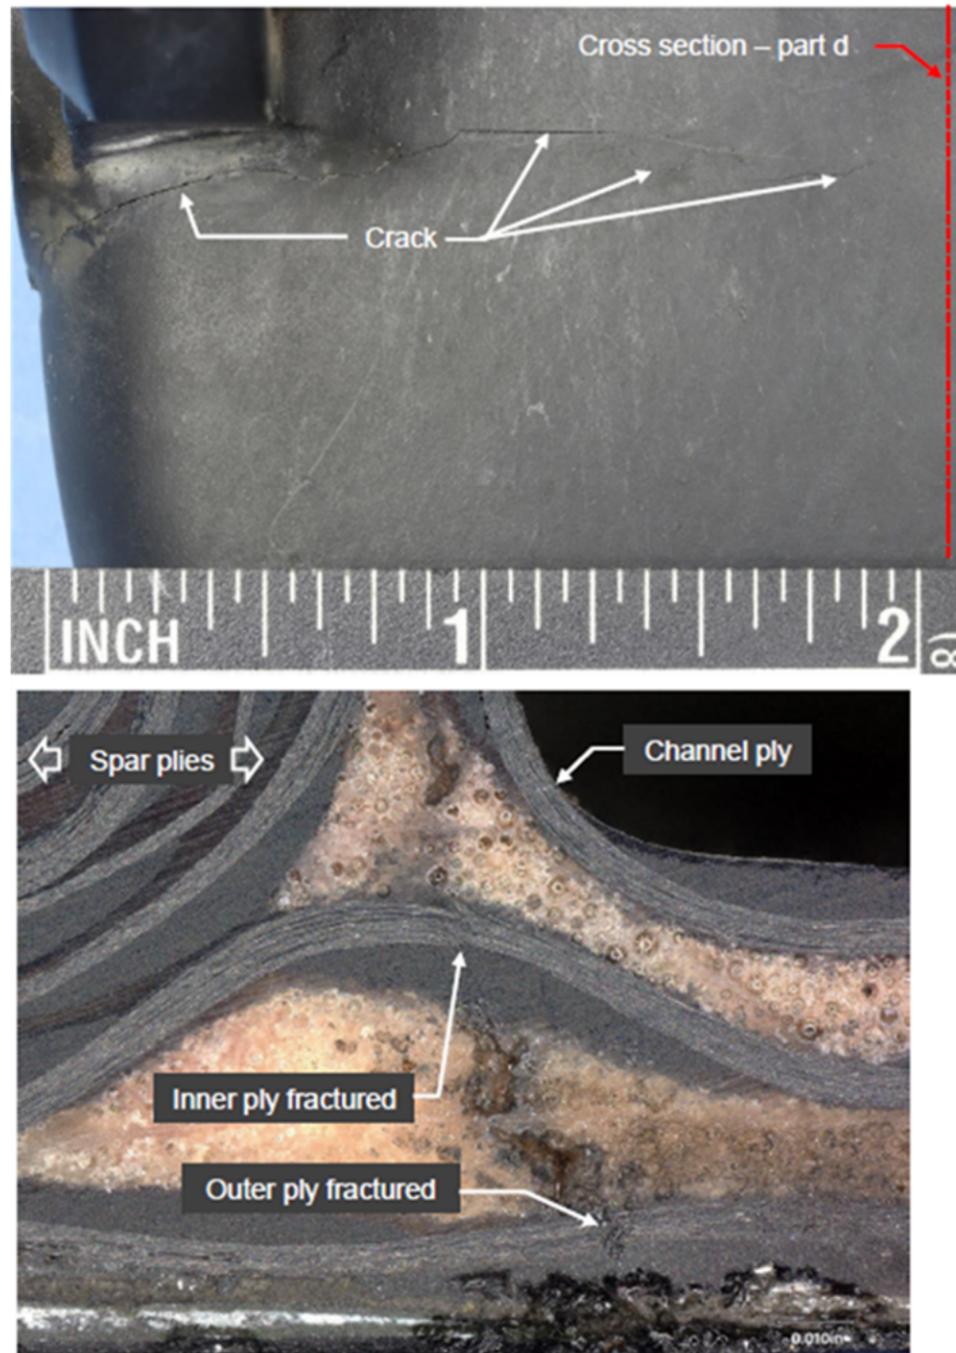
Lower side of closeout (labeled a) and cross-section through the lower skin plies (labeled b).
